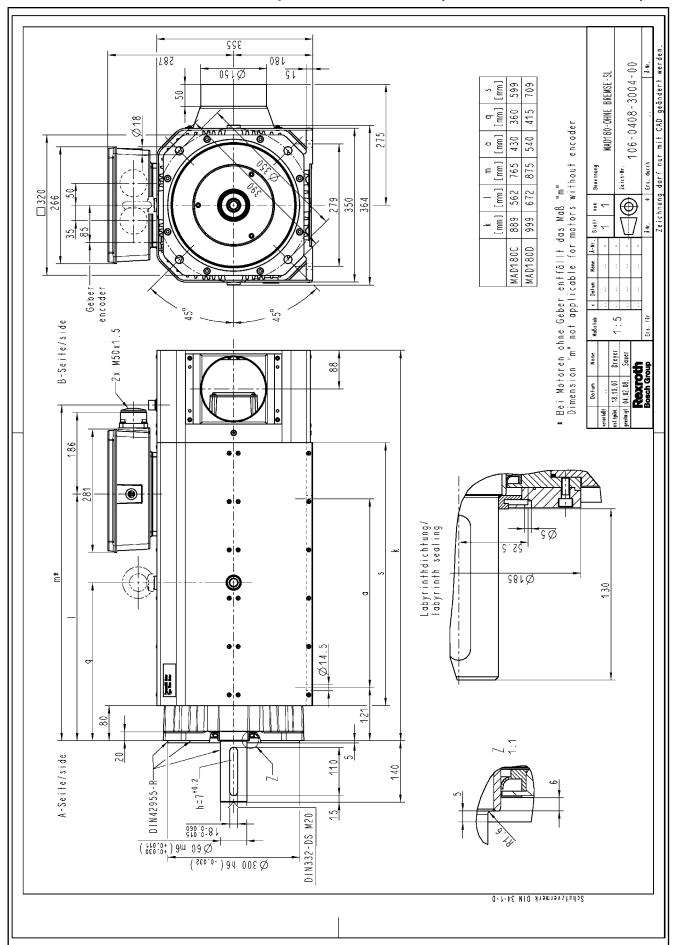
Dimension sheet MAD180 with brake 2 or 5
